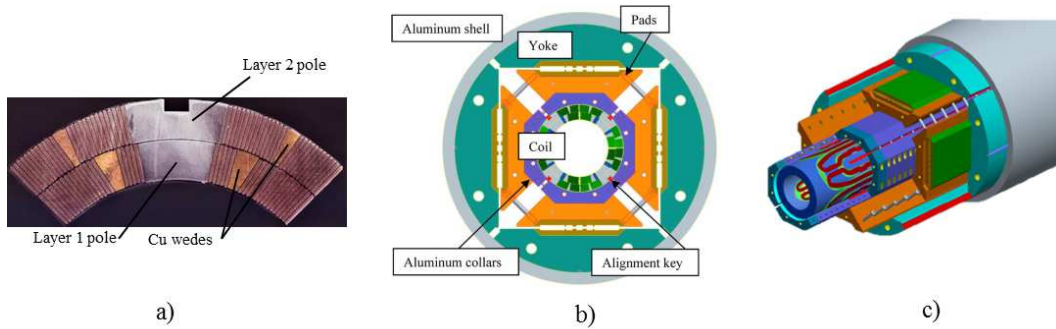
HQ01 a) coil cut, b) magnet cross-section, c) exploded view.
